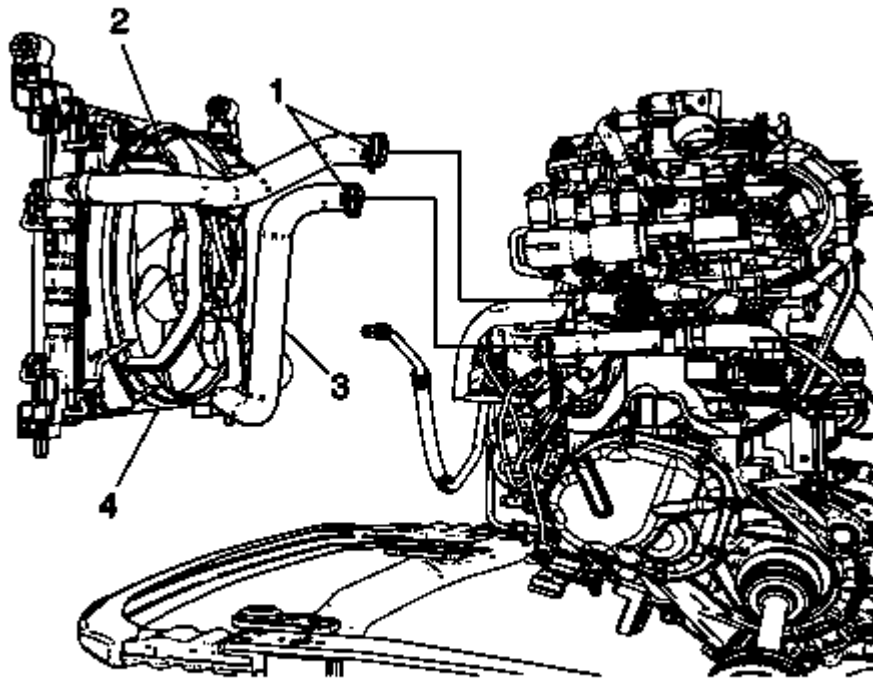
Radiator Inlet And Outlet Hose Clamp
